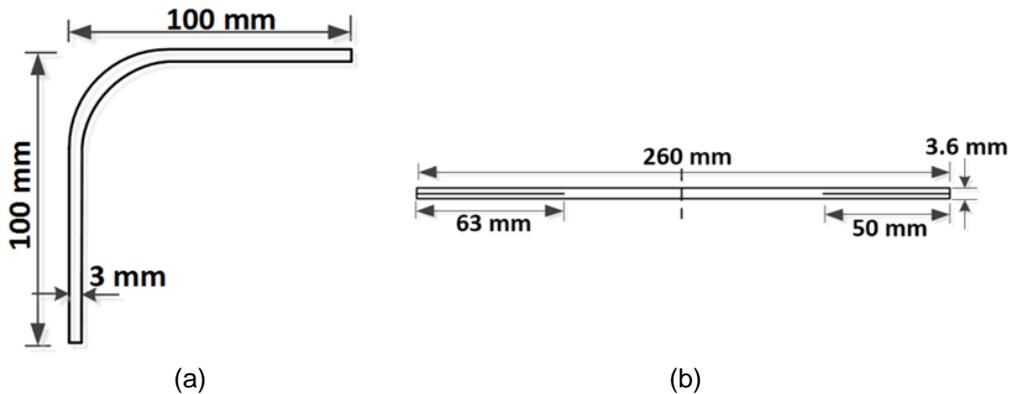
Specimen geometry of thin fiber NCF used for (a) 4-point bending tests and (b) fracture toughness tests.
